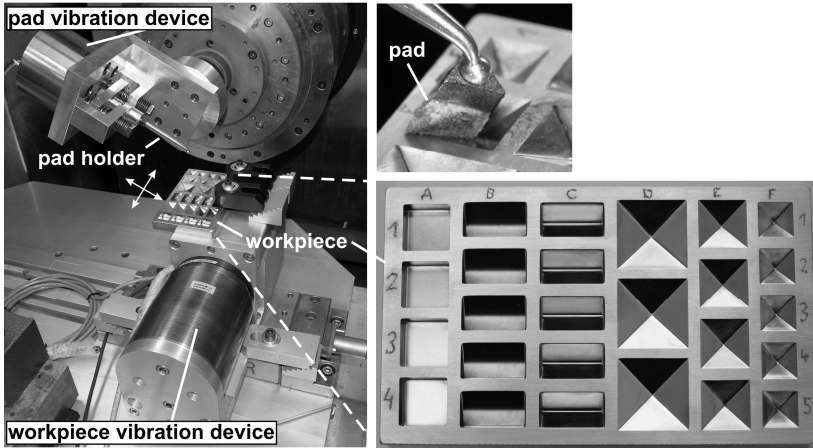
Vibration polishing test set up: voice-coil actuators on workpiece side and pad side [Bri10]
